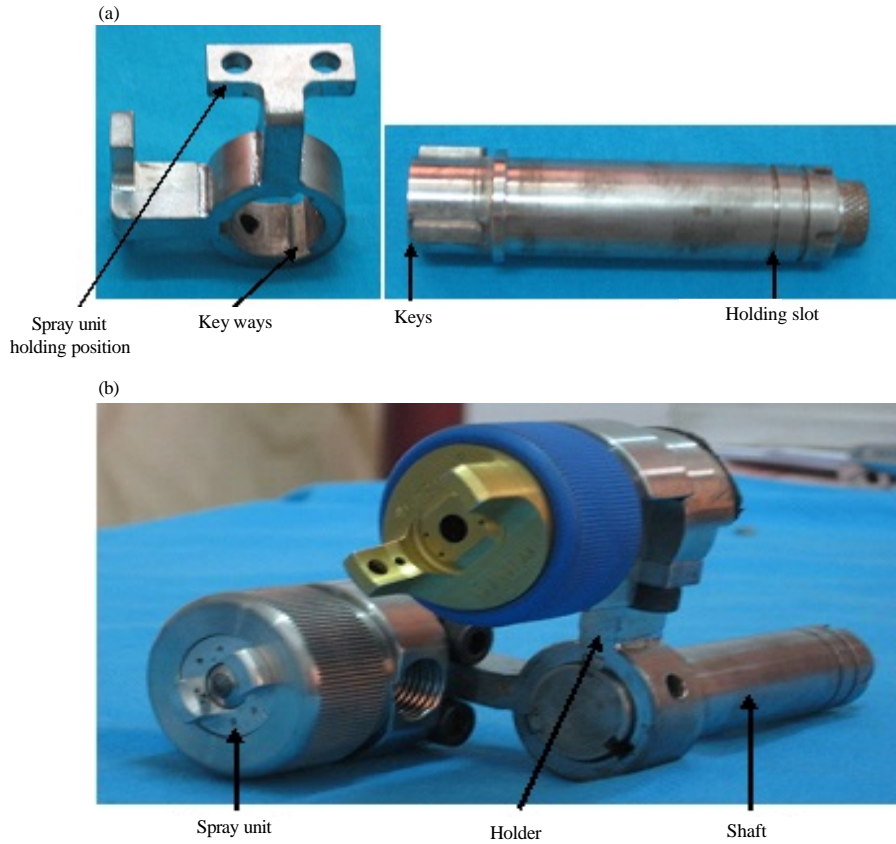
a) Holder and shaft of the spray system; b) Holder and shaft assembly of the spray system
